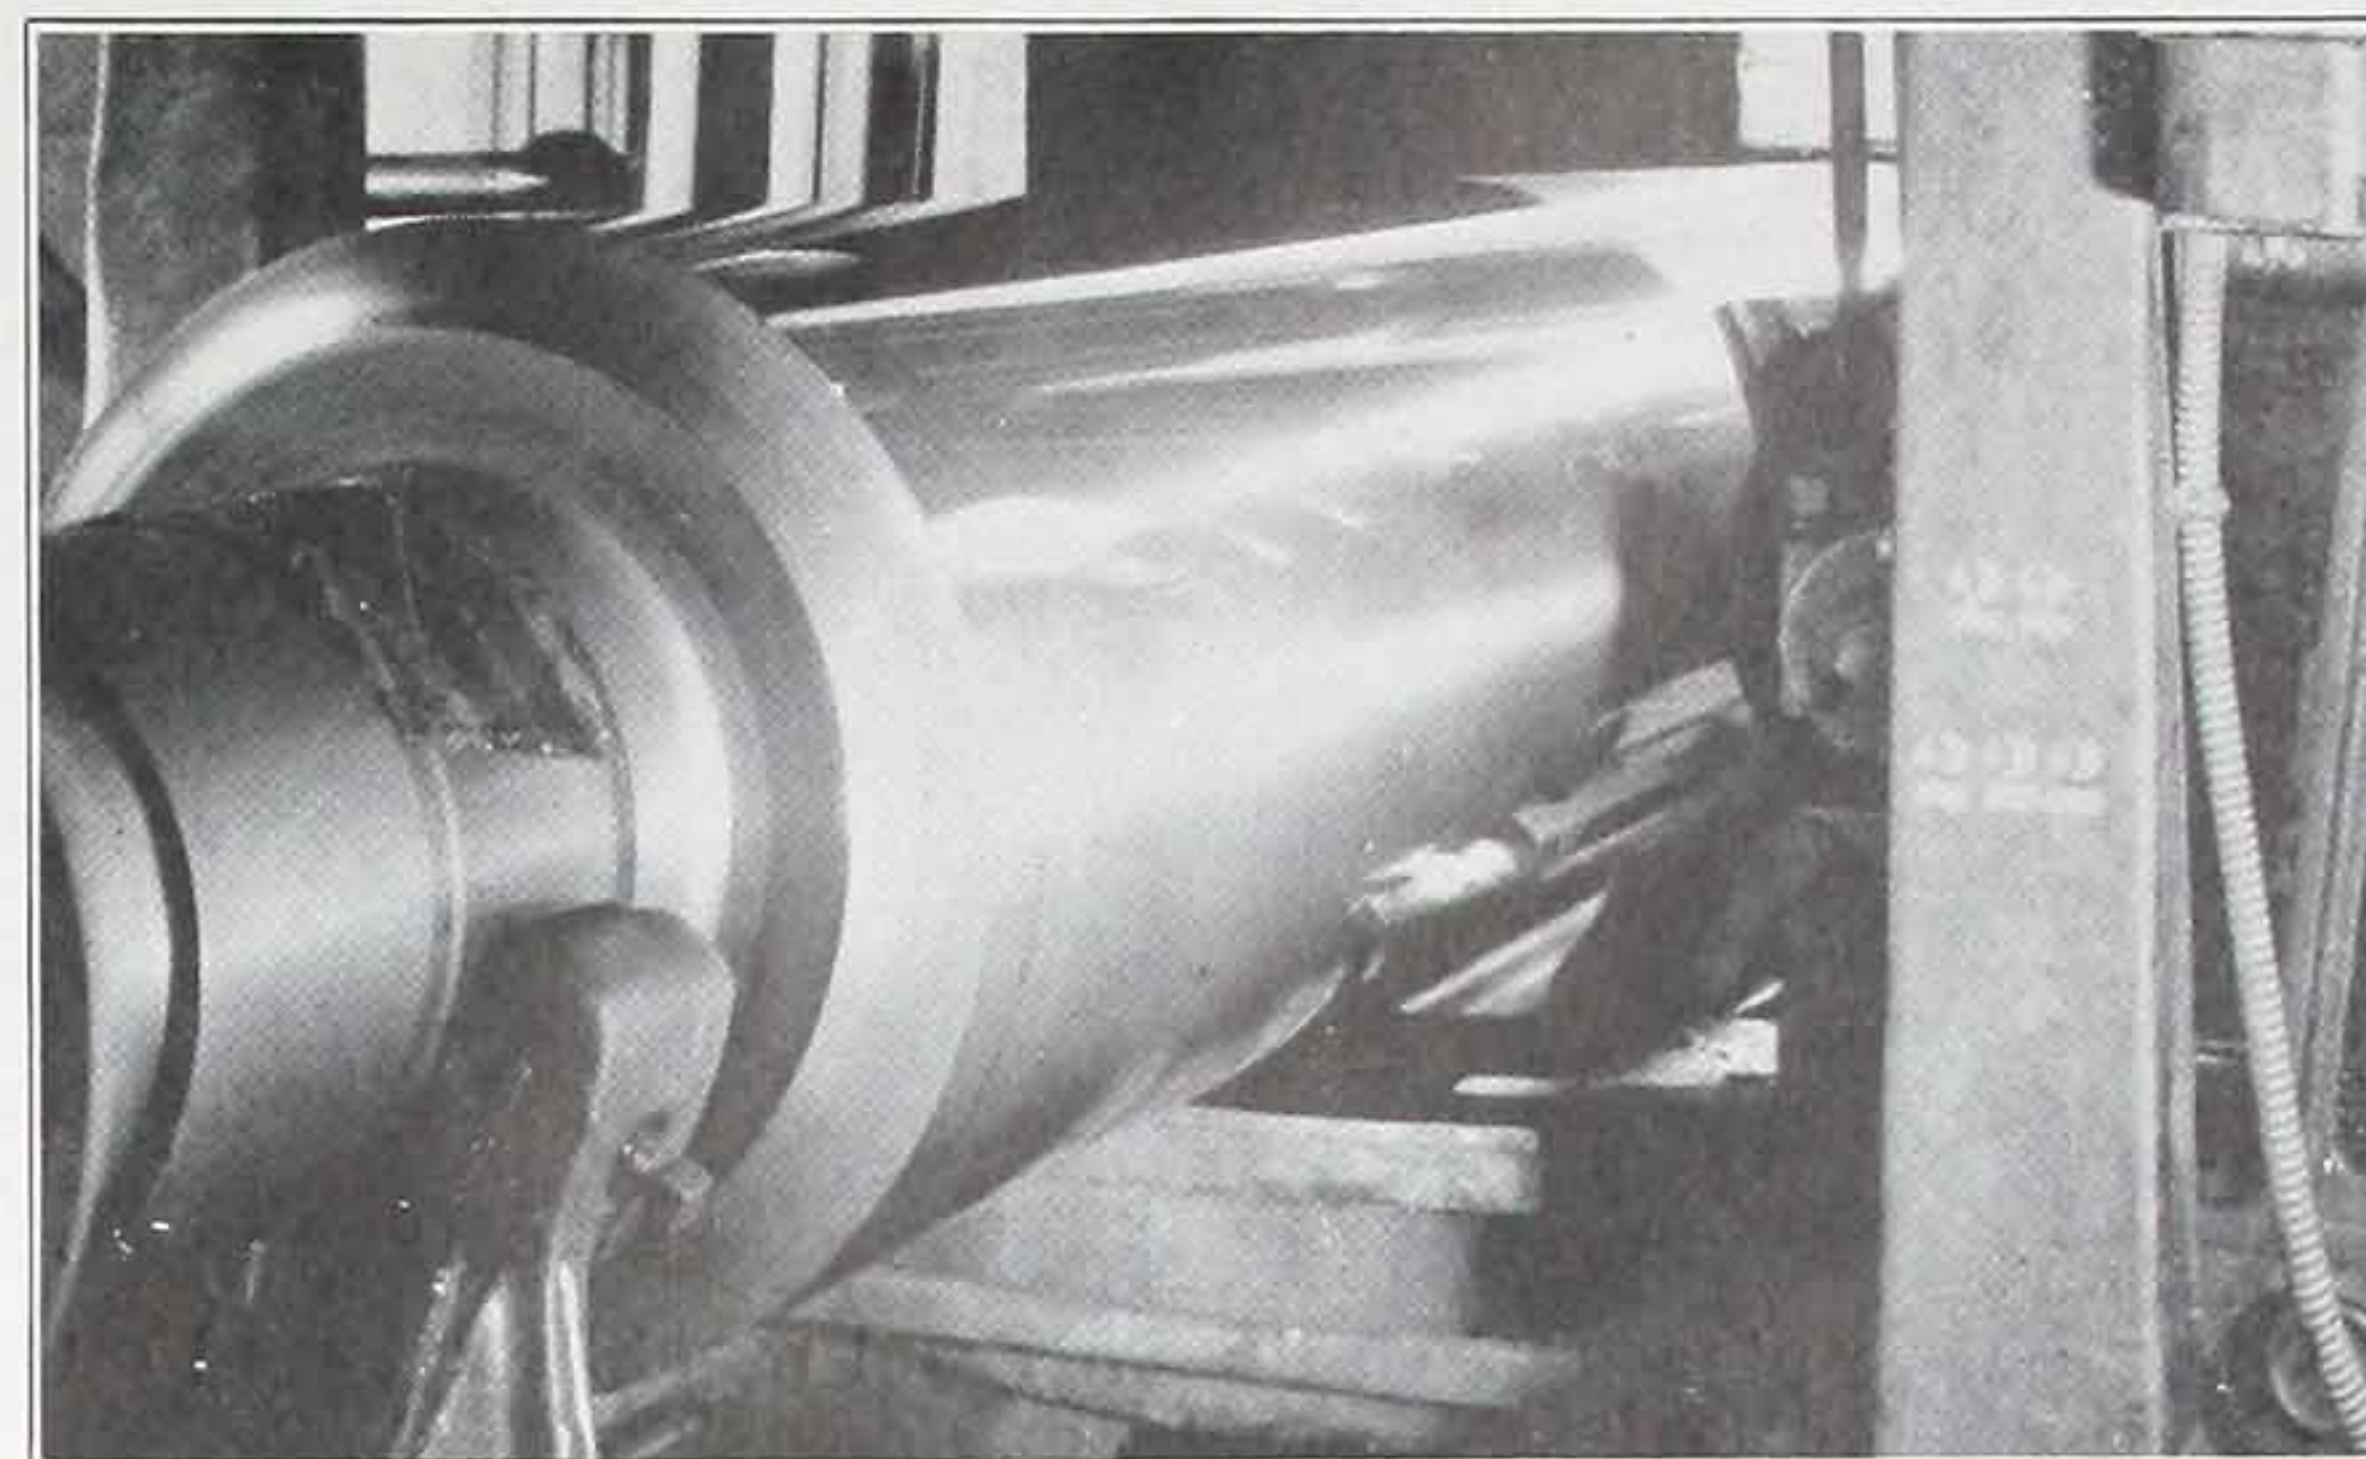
Protection of paper mill rolls in storage against corrosion saves regrinding expense. Stanorust gives the protection needed and is easy to apply and remove.
